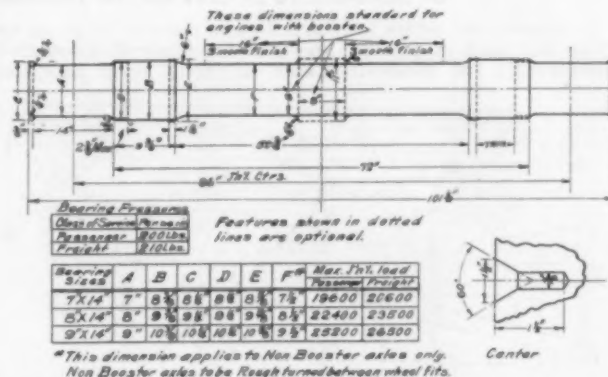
Sizes and Dimensions of Recommended Trailer Truck Axles of the Two-Wheel Type
